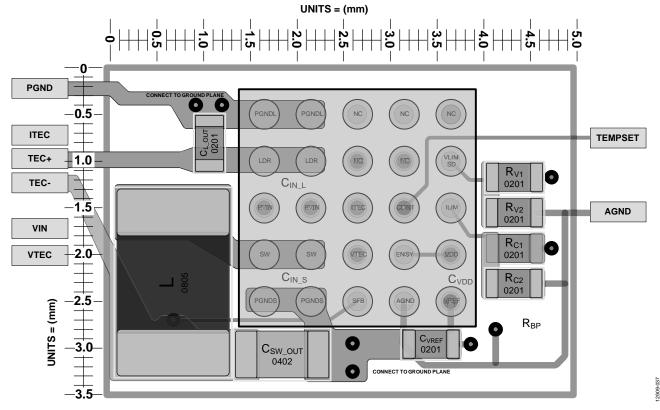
Example PCB Layout Using Two Layers (Top Layer Only)
